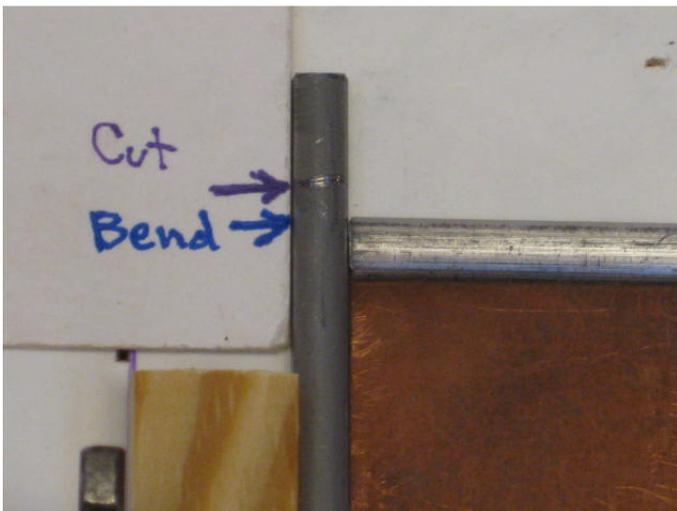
Upper Left Corner Cut and Trimmed marked points.
